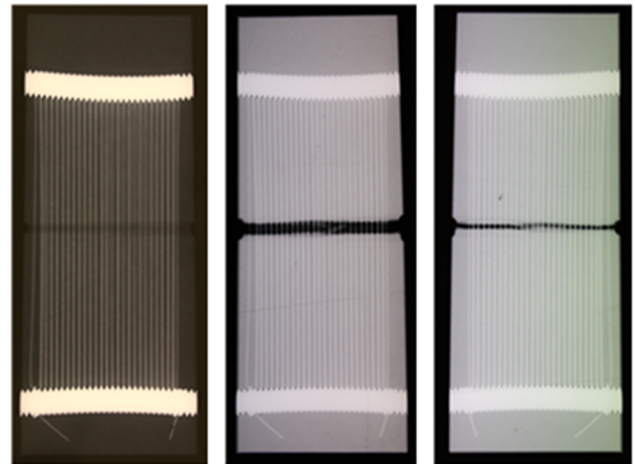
Sample X-ray: (a) before fracture, (b) after fracture, (c) after heat treatment. The bright threaded rods running vertically on the left and right of each image are the threaded steel rods that remained in the test bars during testing.
